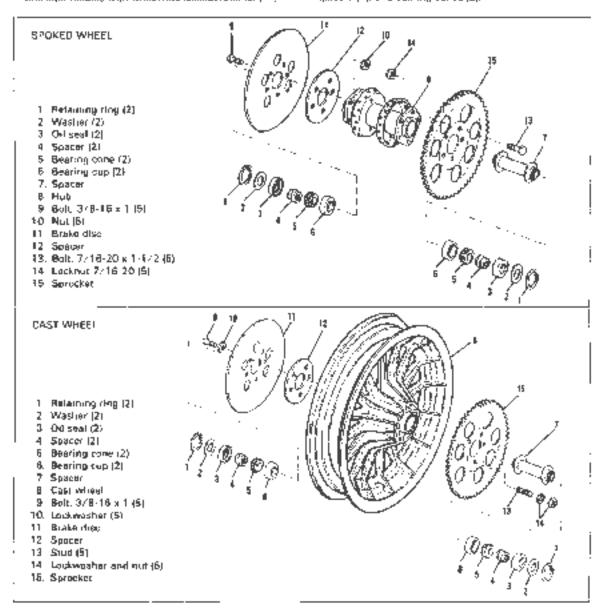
, 16 Inch Wheel Hub (1973 and Later) - Exploded View
